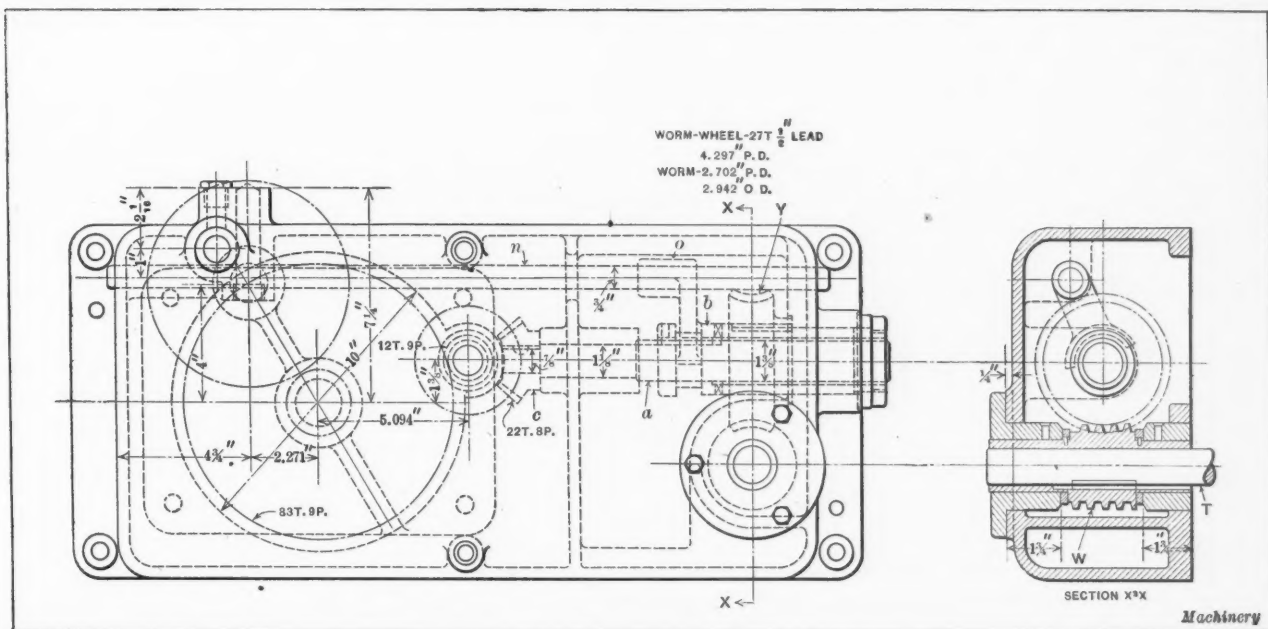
Elevation and Sectional Views of Feed Control Box containing Part of the Mechanism and Clutch for operating the Table of Keyway Milling Machine
